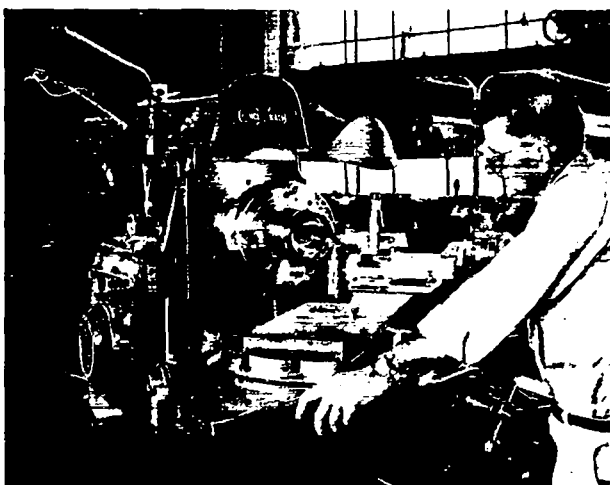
4. Two-inch cathode field forming electrode in milling machine.
